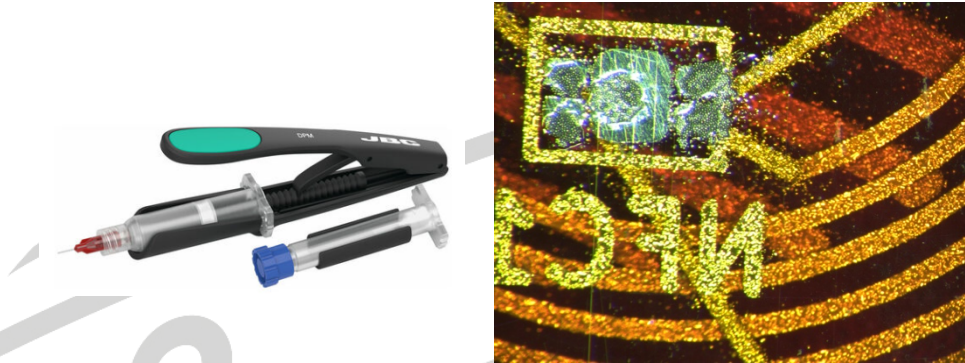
Use of a manual dispenser for placing solder paste (here on the Pads of NFC Tag component)
